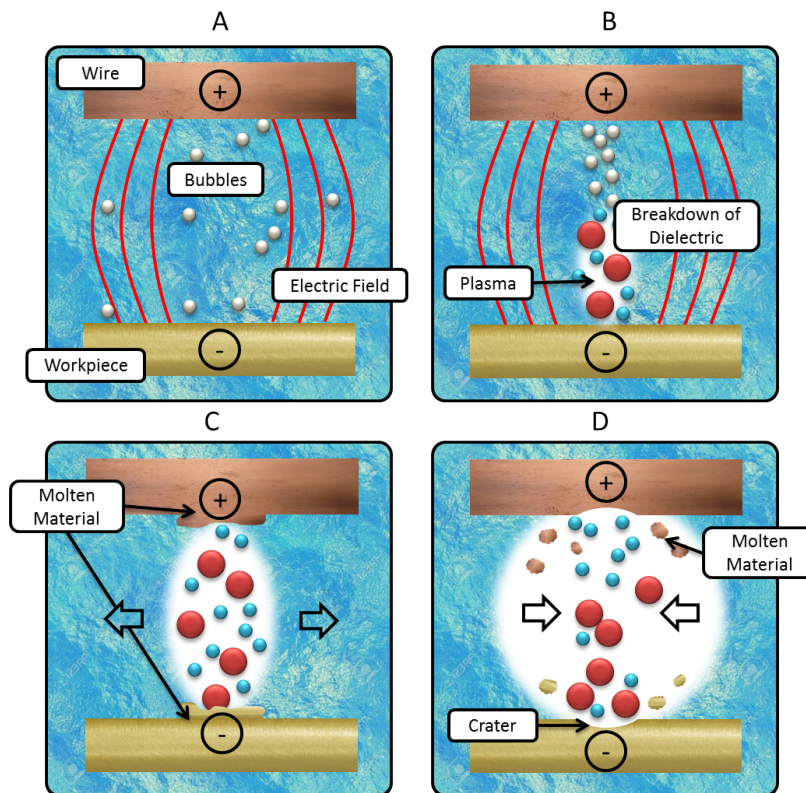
The plasma theory for how an EDM works. The workpiece is shown at the bottom of the image, the wire is at the top. In this instance, the wire acts as the positive electrode.
